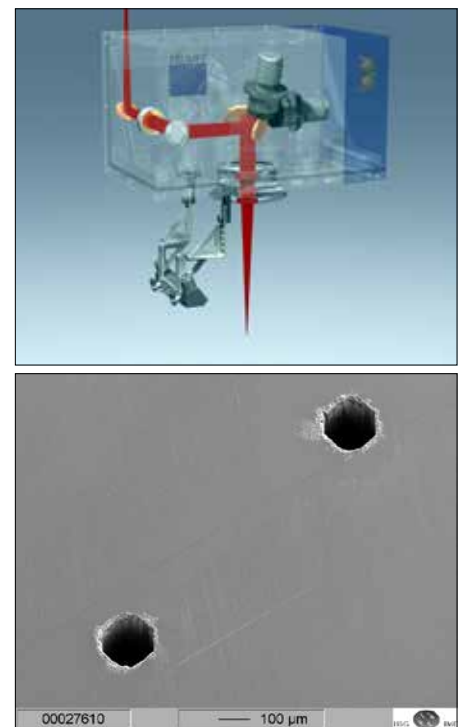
Principle of rapid TSV drilling using XY beam steering via galvanometer driven mirrors; (lower) samples of drilled holes in silicon
